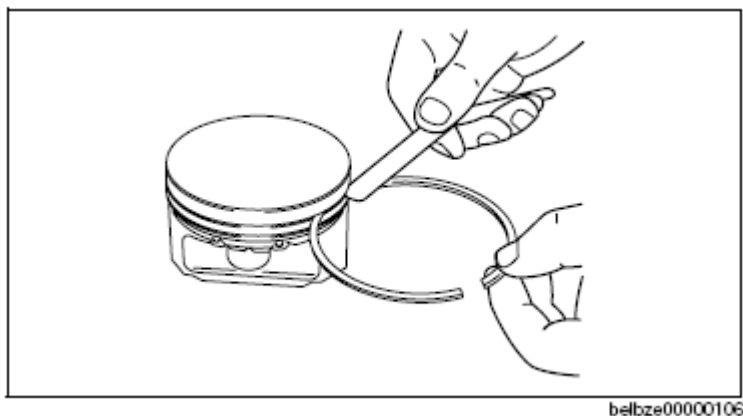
Measuring Piston Ring-To-Ring Groove Clearance Around Entire Circumference
